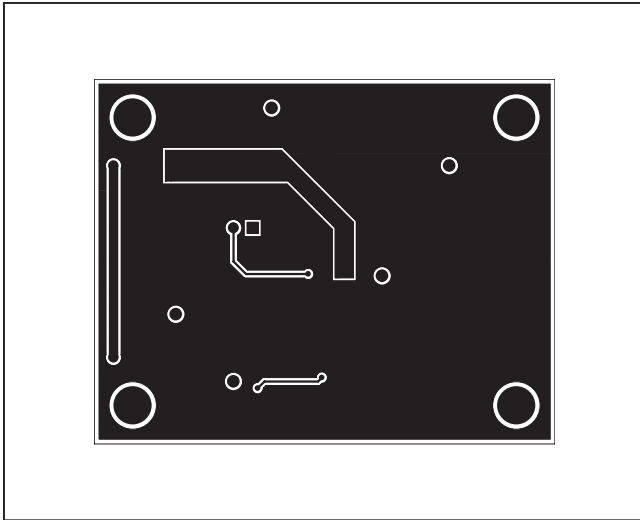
MAX16977 EV Kit PCB Layout—Solder Side
